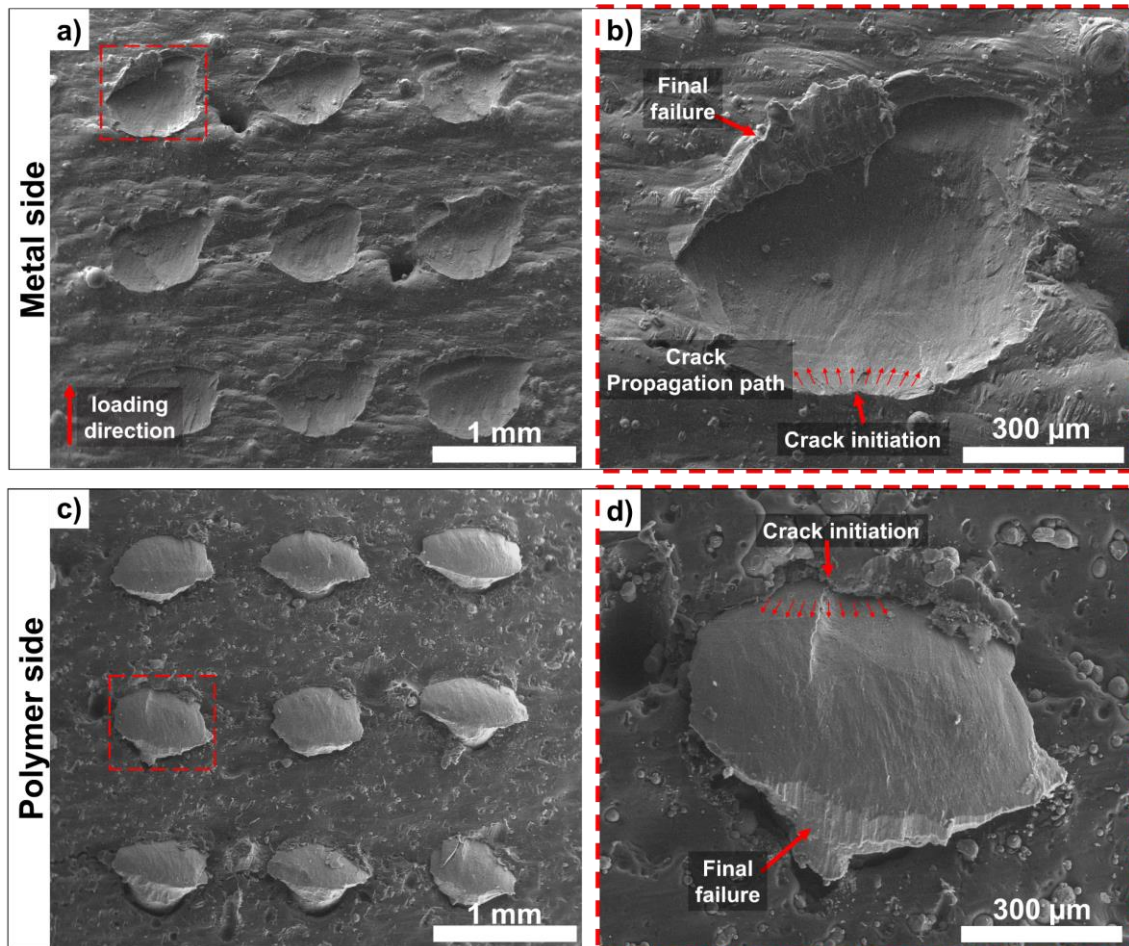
Zone (ii) showed in Figure 4.30 of the fracture surface of a PC/AlSi10Mg joint with mushroom-like structuring after fatigue testing at 70% of ULSF. Low (a) and high (b) magnifications of the fracture surface of the base of mushroom-like structures on the metal part; low (c) and high (d) magnifications of the fracture surface of the polymer part showing the base of mushroom-like structures ruptured and attached to the polymer part.
